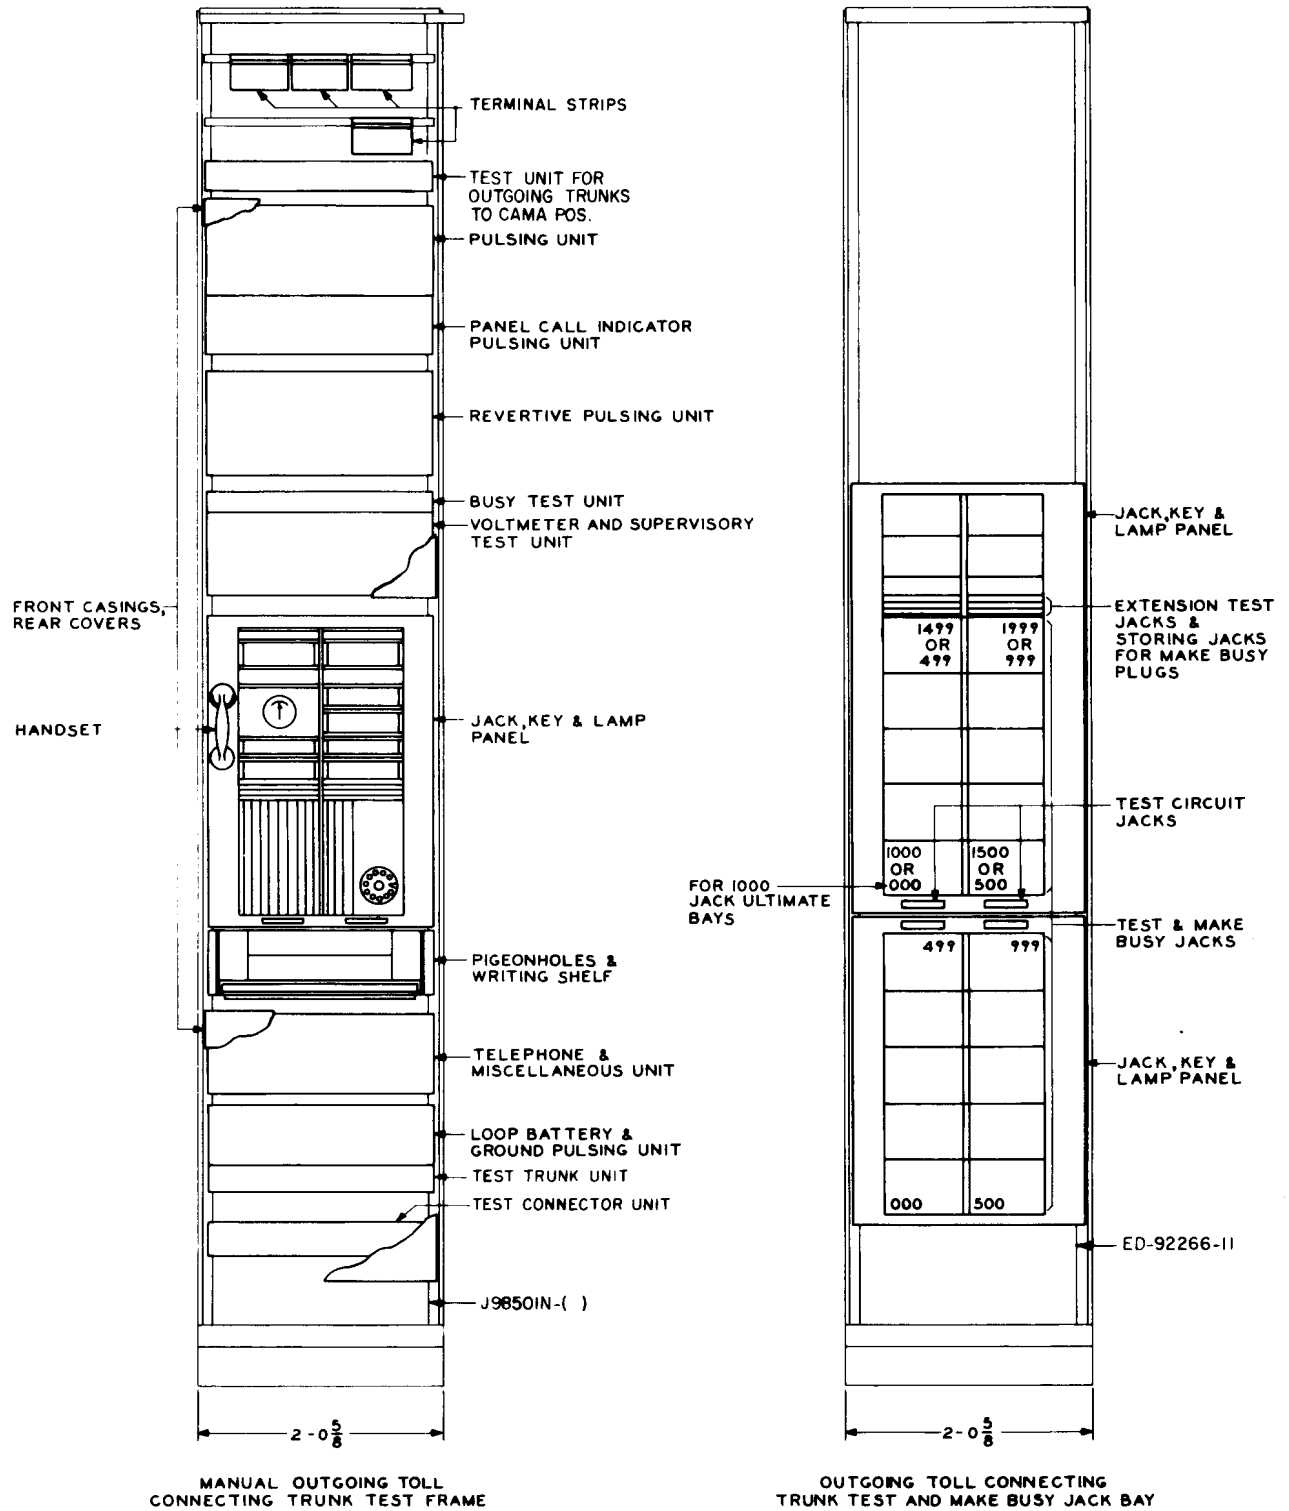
Manual Outgoing Toll Connecting Trunk Test Frame (5.73)
